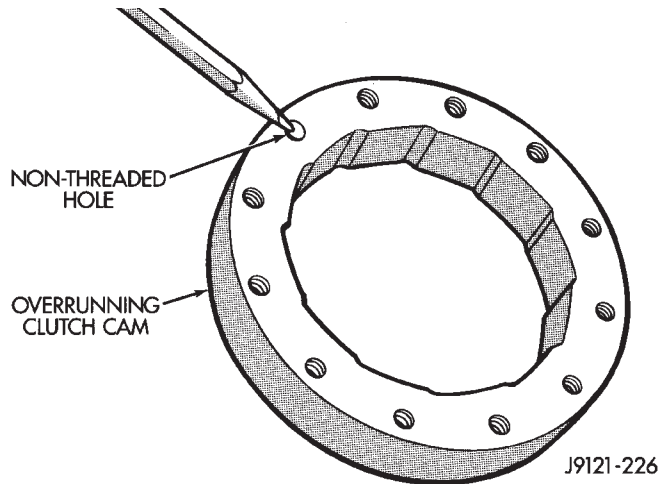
Location Of Non-Threaded Hole In Clutch Cam
